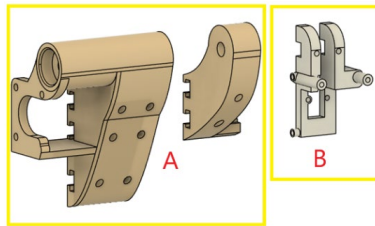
CAD model of traditional FDM printed PA12 nylon cylindrical print table, stepper motor and screw rod (A) and printhead elements (B) mounting.
